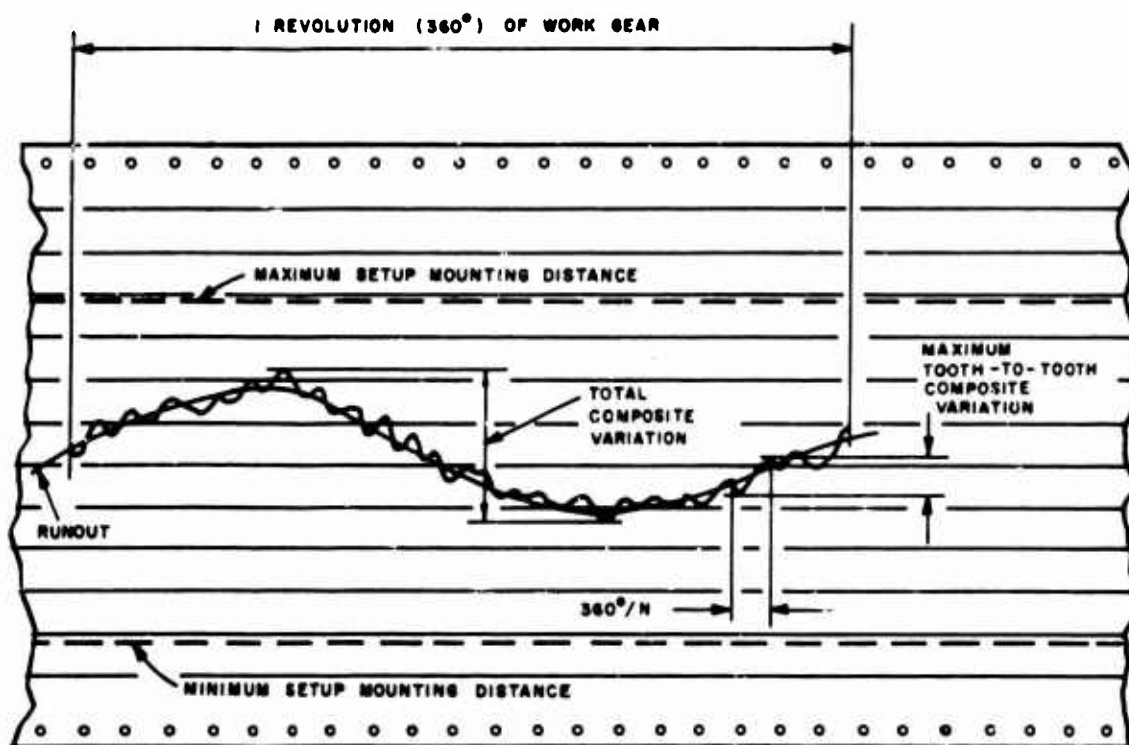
Chart of Gear Tooth Errors of a Typical Gear When Run With a Master Gear on a Gear Rolling Fixture.
